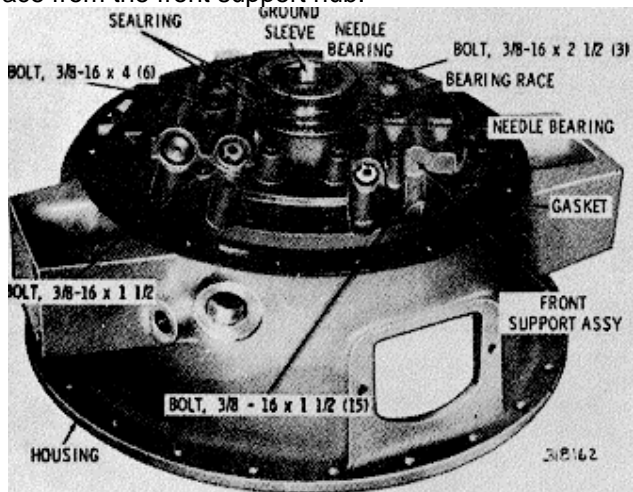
Converter housing components (2.bolt cover, no retarder).
